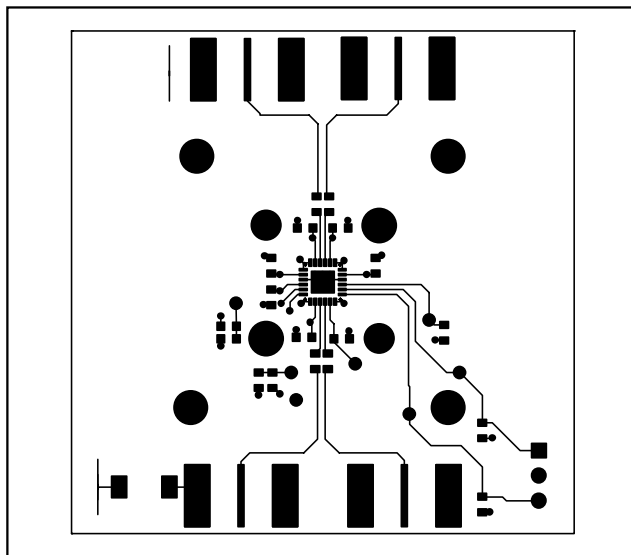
MAX3801 EV Kit PC Board Layout—Component Side
